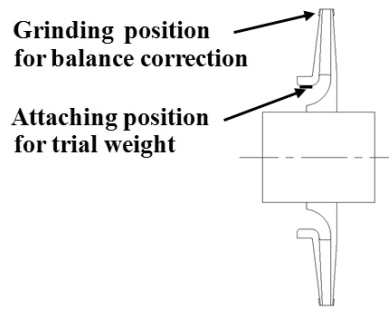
Attaching position for trial weight and grinding position for balance correction at the impeller 2 and 7
